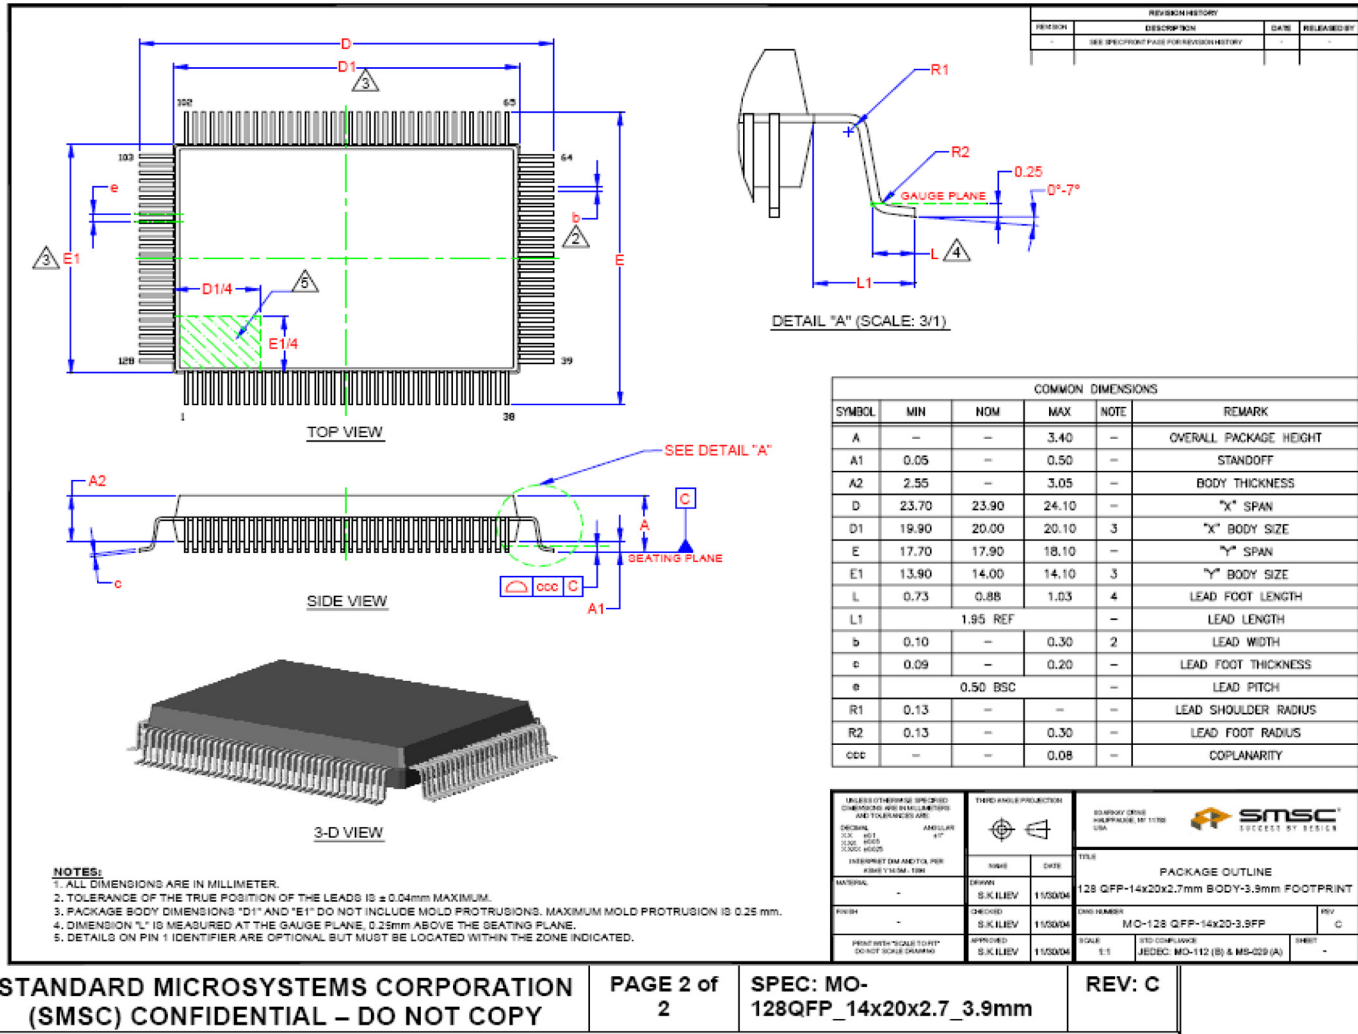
128-Pin QFP Package Outline (3.9mm footprint)
